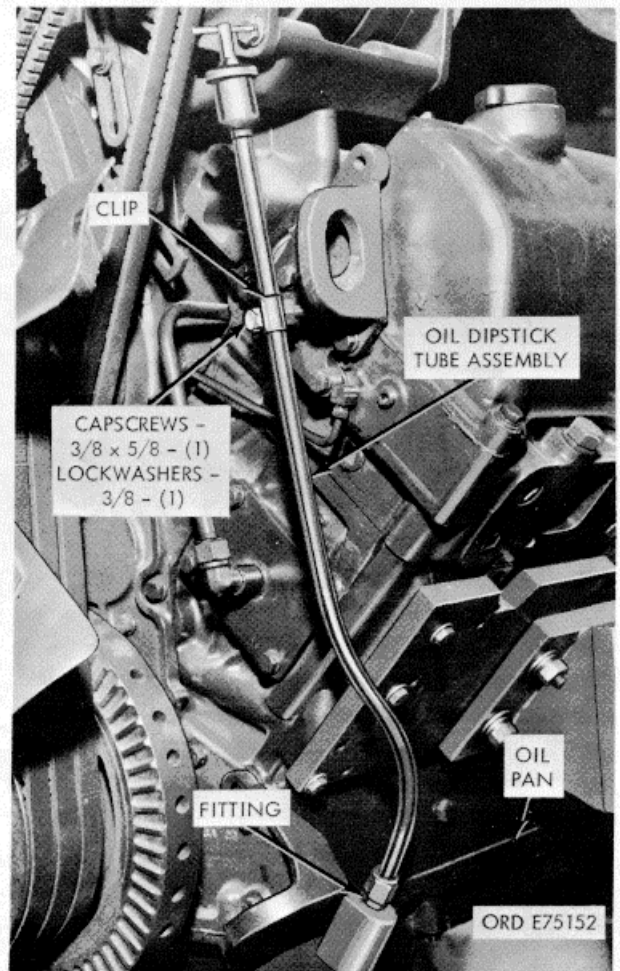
Oil dipstick tube assembly--removal/installation.
